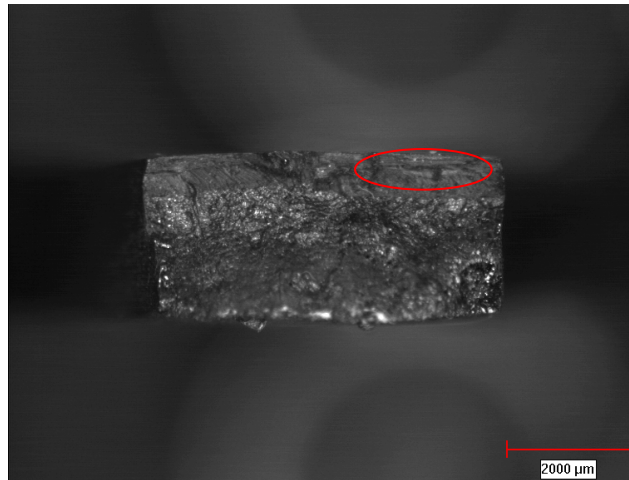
Fracture surfaces on 0.2% mechanical strain Inconel 738 specimen
